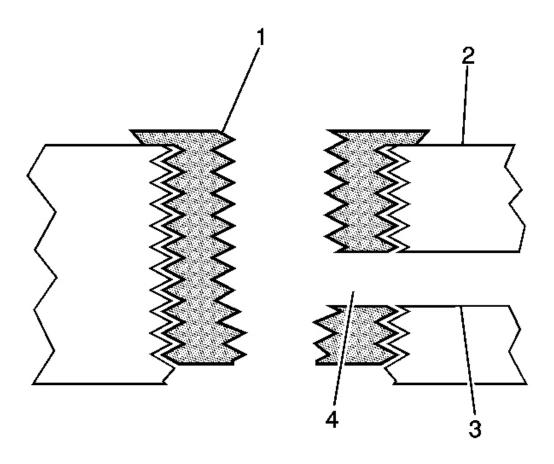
View Of Restricted Engine Coolant Passages - Tapered Pipe Thread Repair Courtesy of GENERAL MOTORS CORP.
